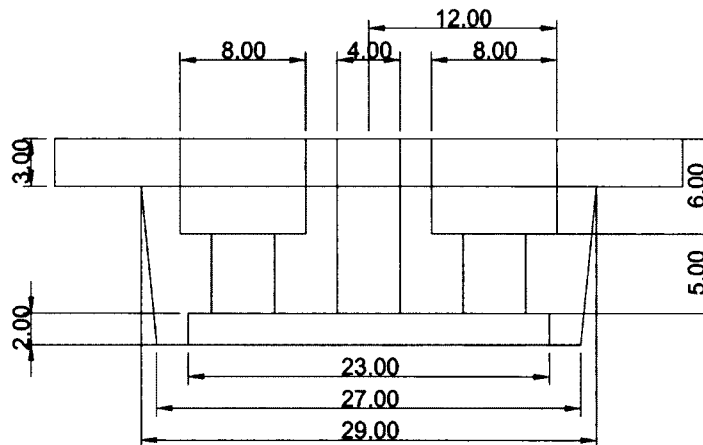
Tray mounting bracket specification (mount detail, front view) - smaller bracket surface for clarity (all construction units in millimetres).
